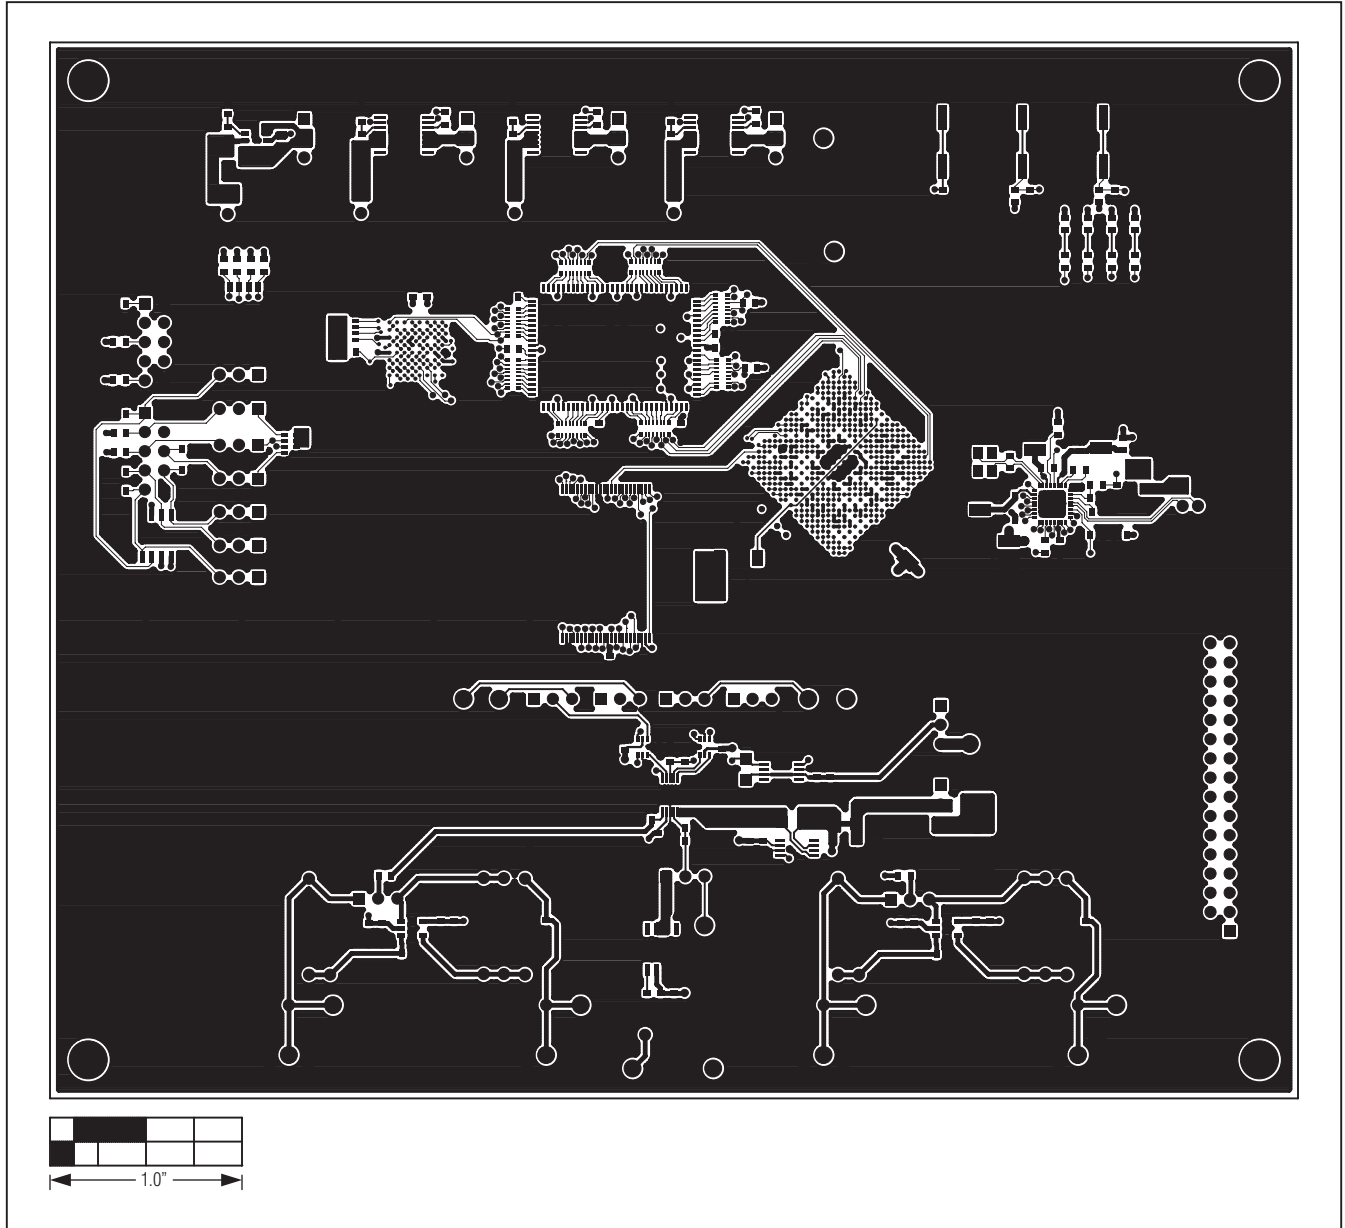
MAX11666 EV Kit PCB Layout—Component Side
